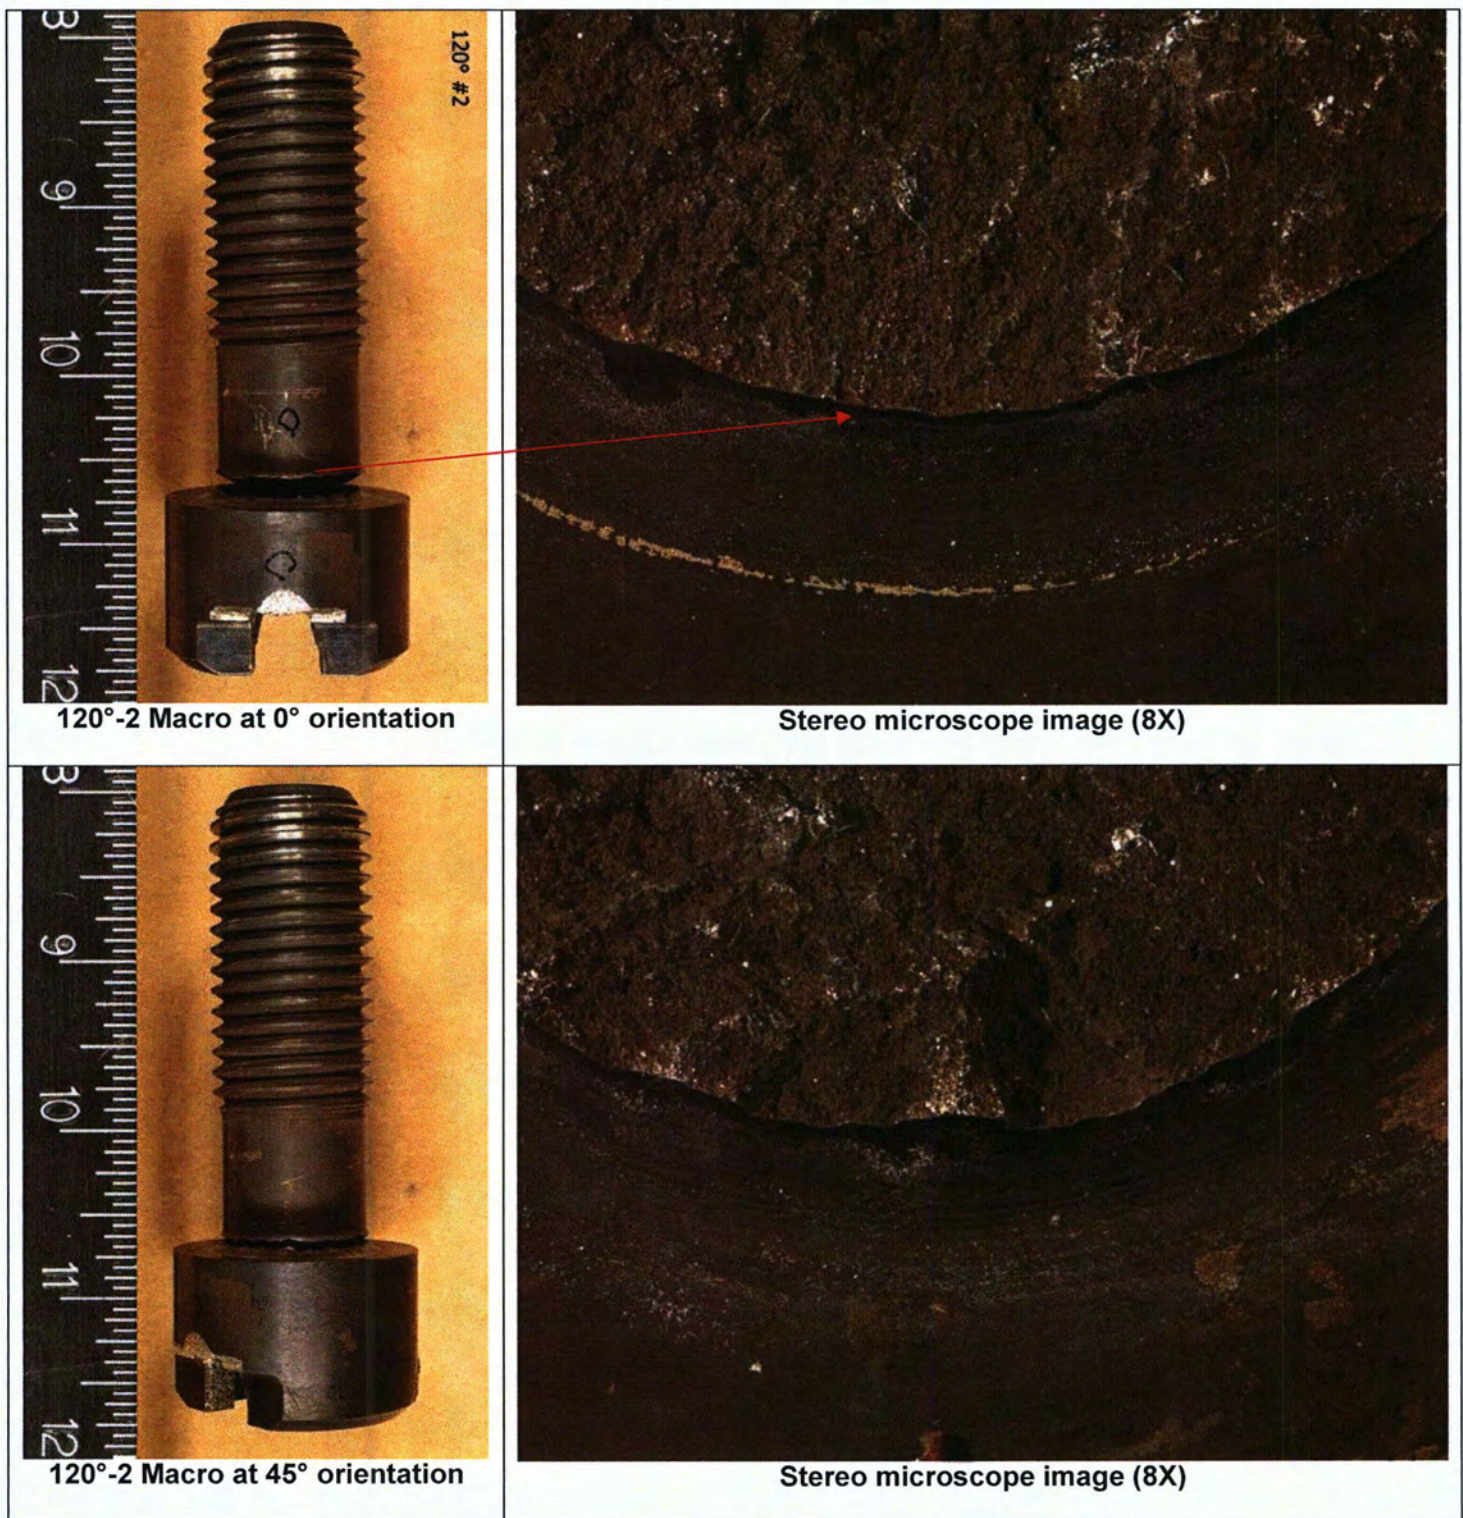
Macro and stereo photographs of bolt 120°-2 taken at 45° increments.
